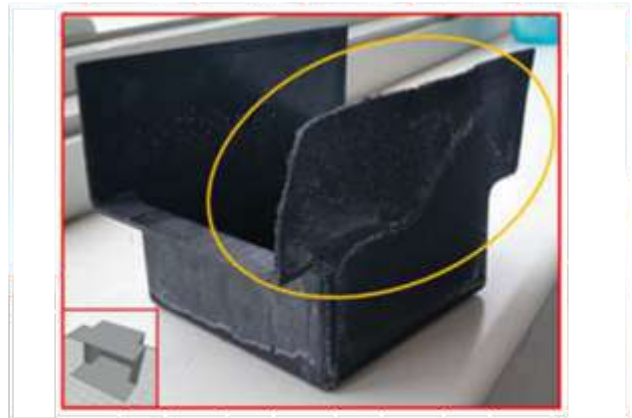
Poor dimensional quality and surface finish of 3D printed part caused due to multiple reasons:
